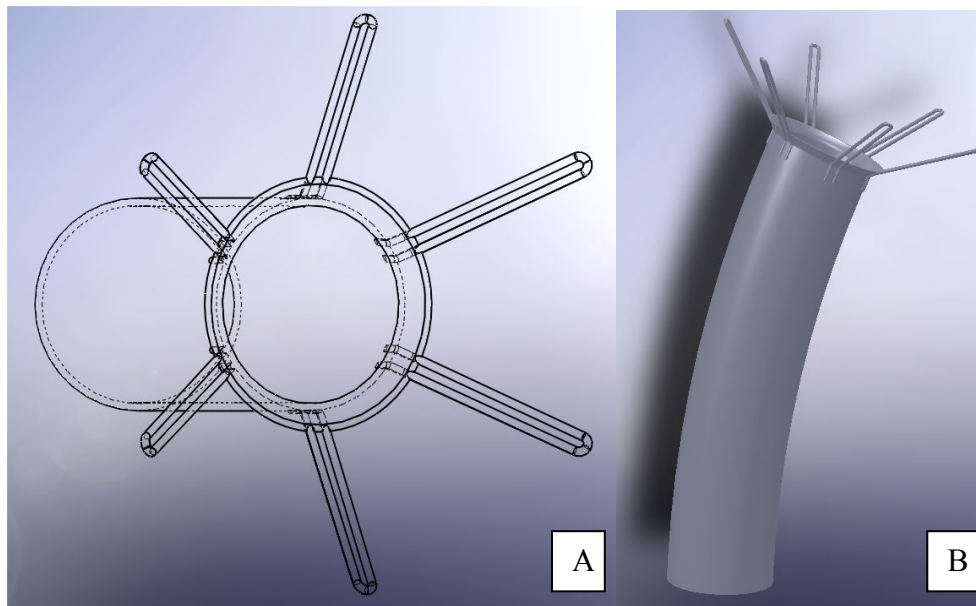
PASS design in SolidWorks. (A) Top view; (B) isometric view.
